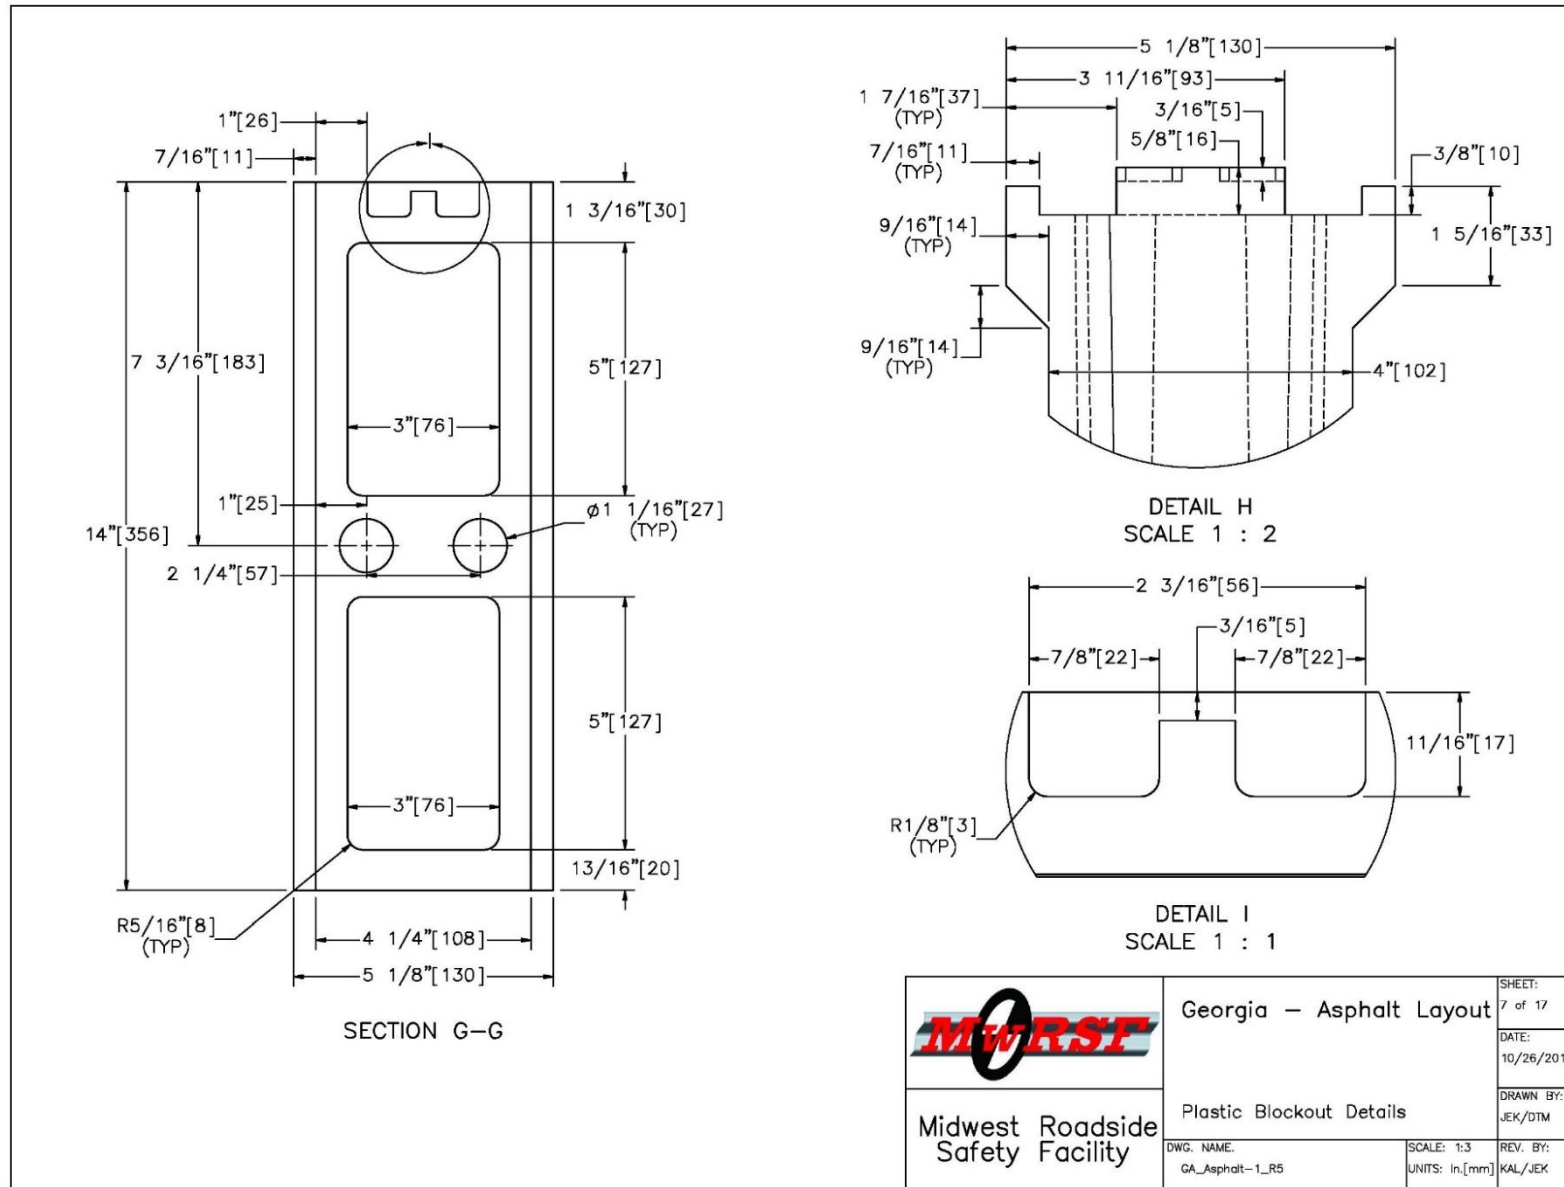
Additional Plastic Blockout Details, Test No. GAA-1
